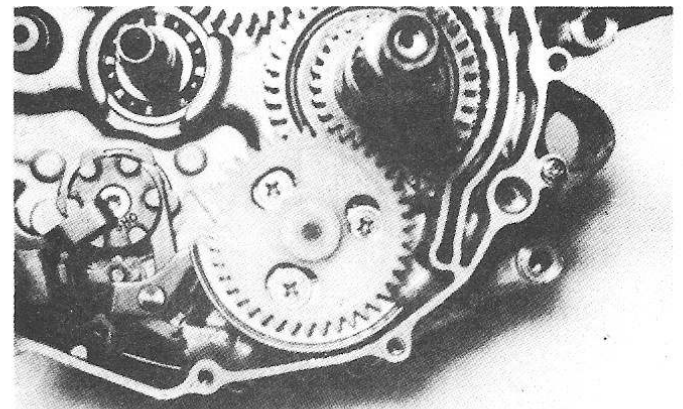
B.31 Rotate the gear to expose the oil pump mounting screws (Sec 16)
